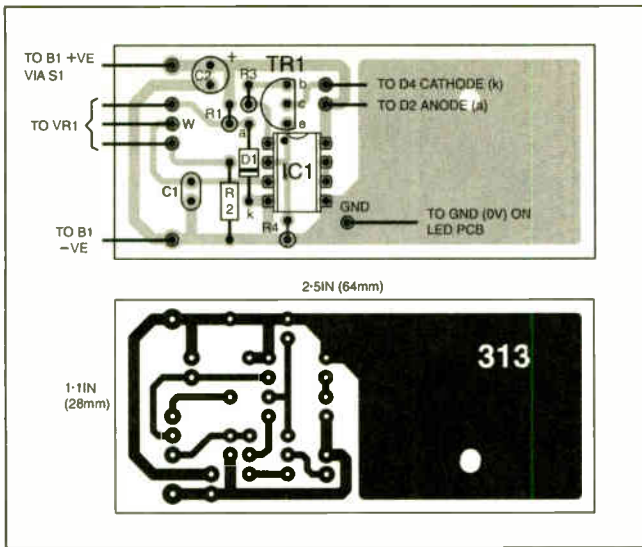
Red L.E.D. Torch main p.c.b. component layout and full-size copper foil master.
